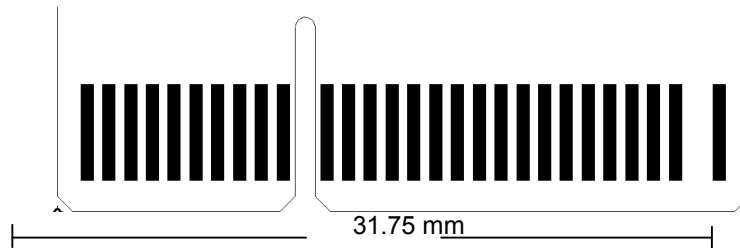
The PCB footprint that mates with the Samtec MEC1 connector.
